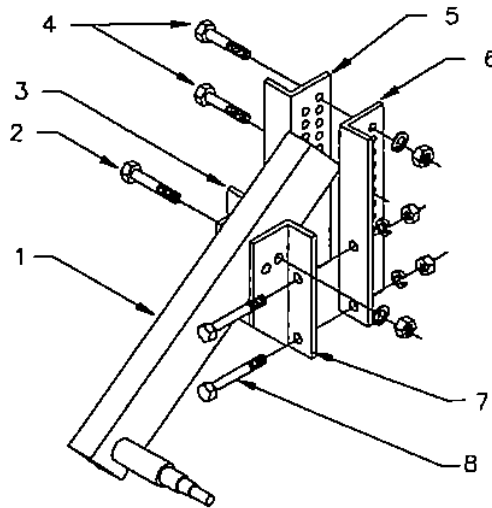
PIN TYPE GAUGE WHEEL COMPONENTS - rigid frame
